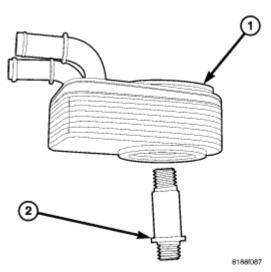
OIL COOLER MOUNTING Courtesy of CHRYSLER LLC
